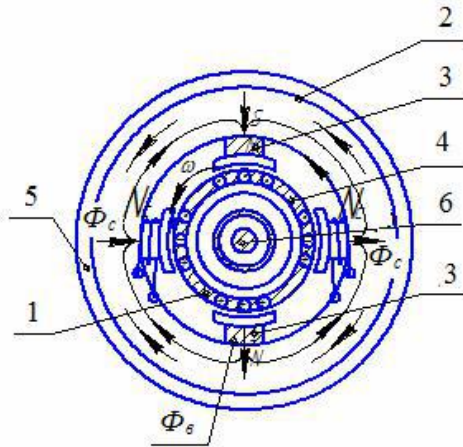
Angular acceleration indicator: 1 and 2 - internal and external magnetic circuits; 3 - permanent magnets; 3- rotor, 5 - hull with bearing assemblies; 6 - shaft.
